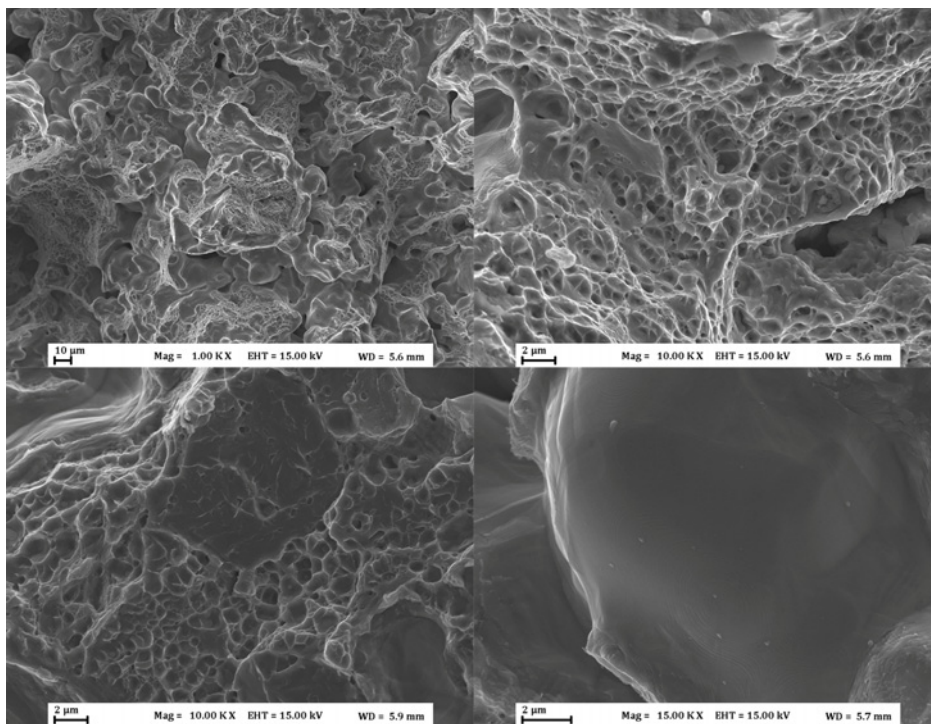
Fracture surface of low Cr alloyed material sintered at 1120°C.
